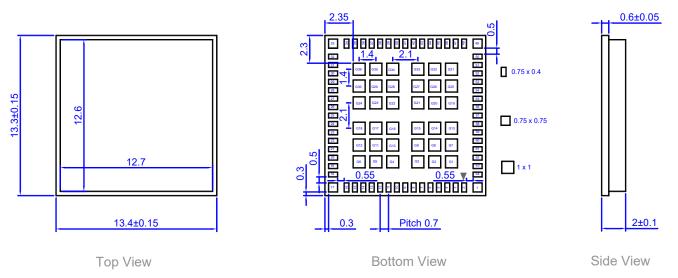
Mechanical Drawing of BDE-BW3301NP1 and BDE-BW3301NP2
